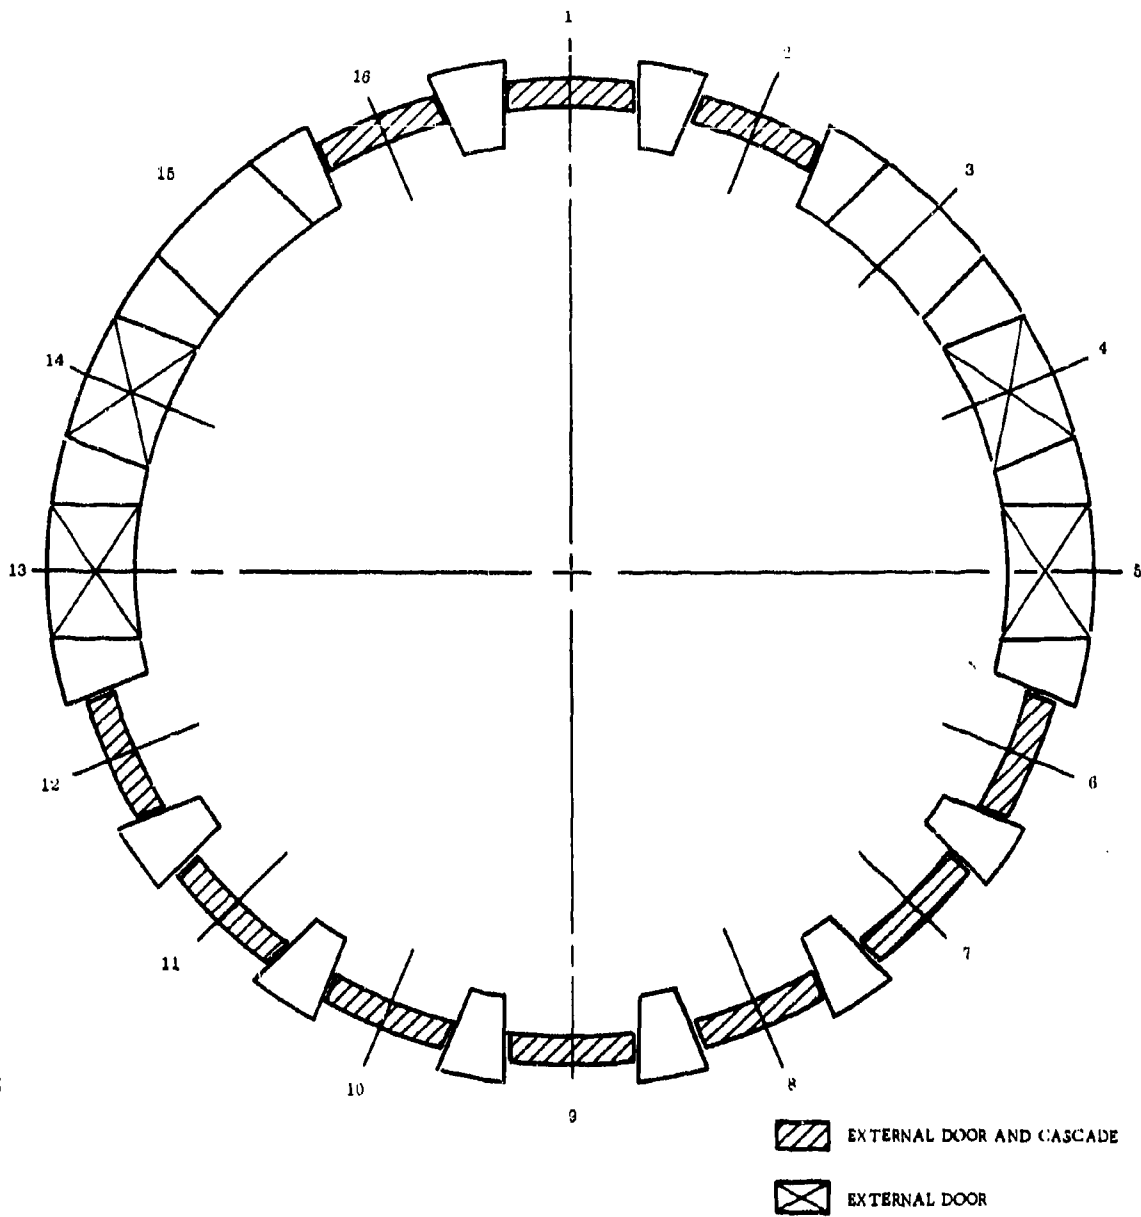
(L). External Door and Reverser Cascade Arrangement
